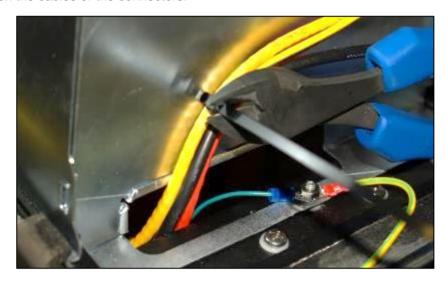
Cable tie cable bundle to Insulating Cover.
